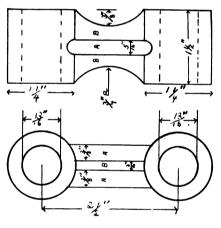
THE SMITH MUST BE ABLE TO READ DRAWINGS
